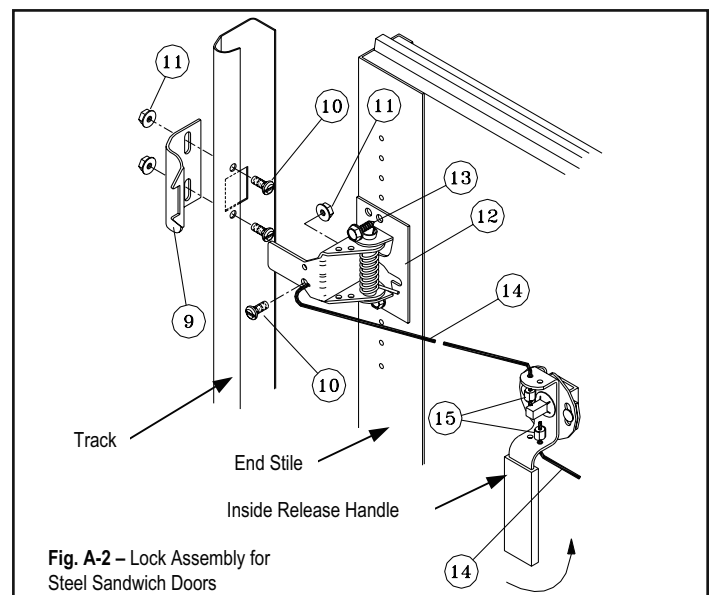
Lock Assembly for Steel Sandwich Doors
